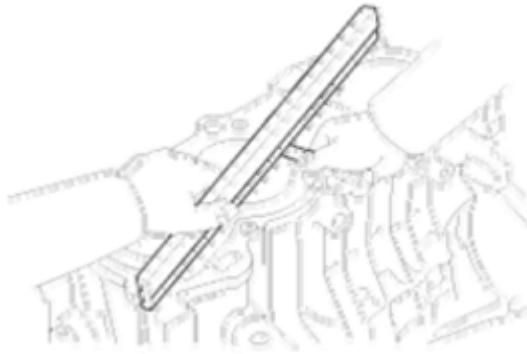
Inspecting Top Surface Of Cylinder Block For Flatness
